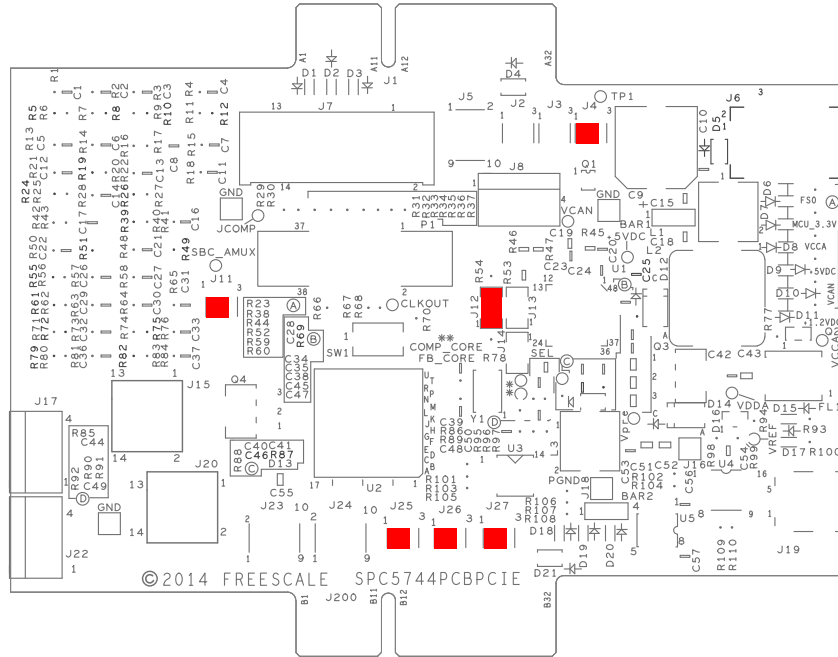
MPC5744P Controller Board Jumper Position and Default Setting
